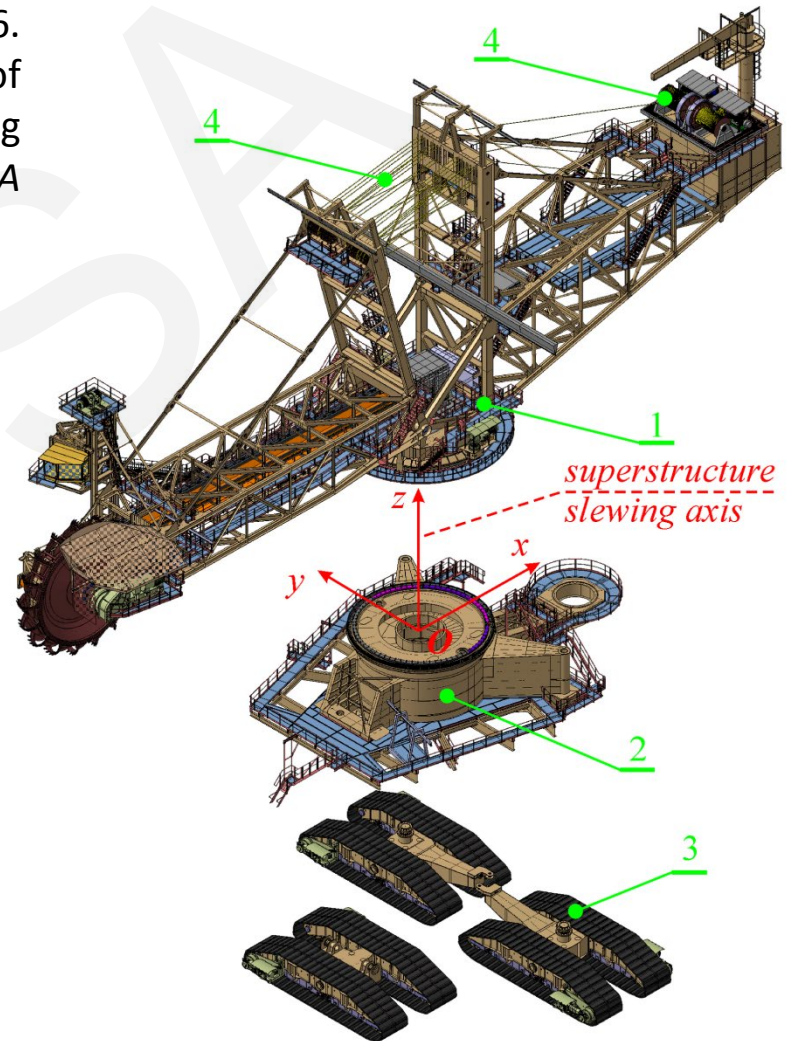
Main parts of the BWE 1600: 1 – slewing superstructure; 2 – substructure; 3 – traveling mechanism; 4 – winches for BWB positioning
